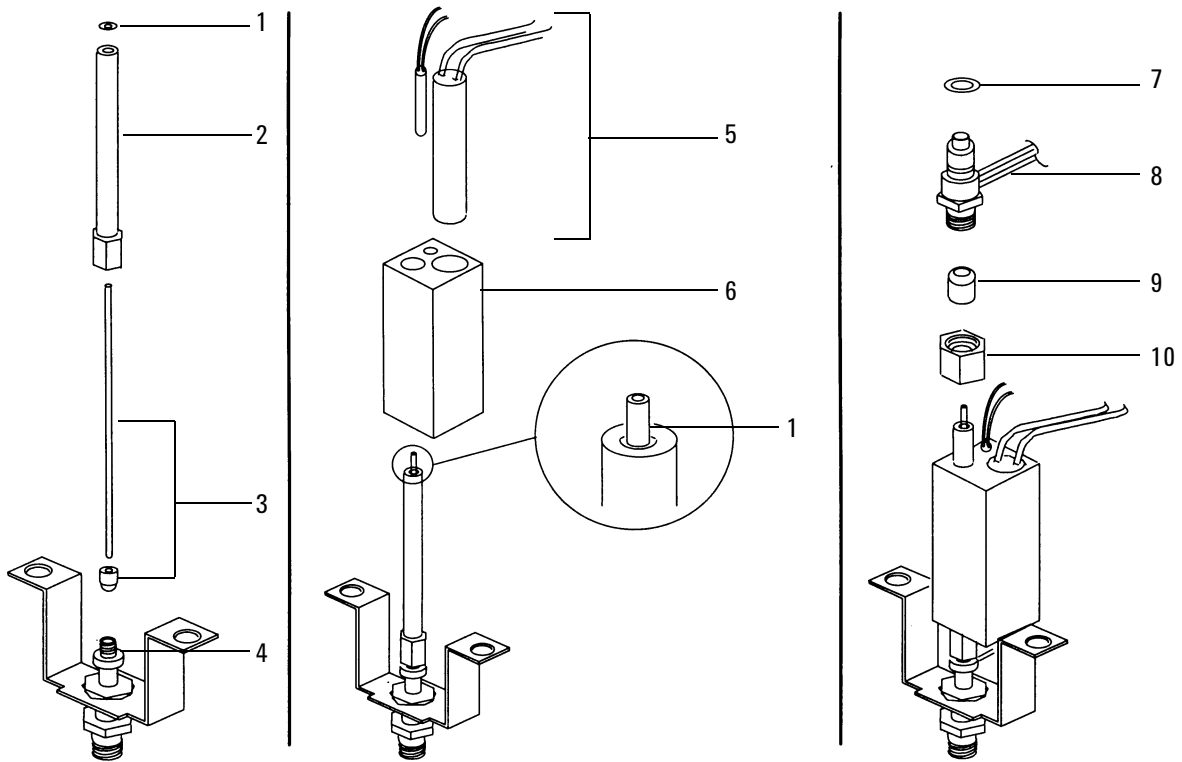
Exploded diagram of the jet and transfer tube assemblies
